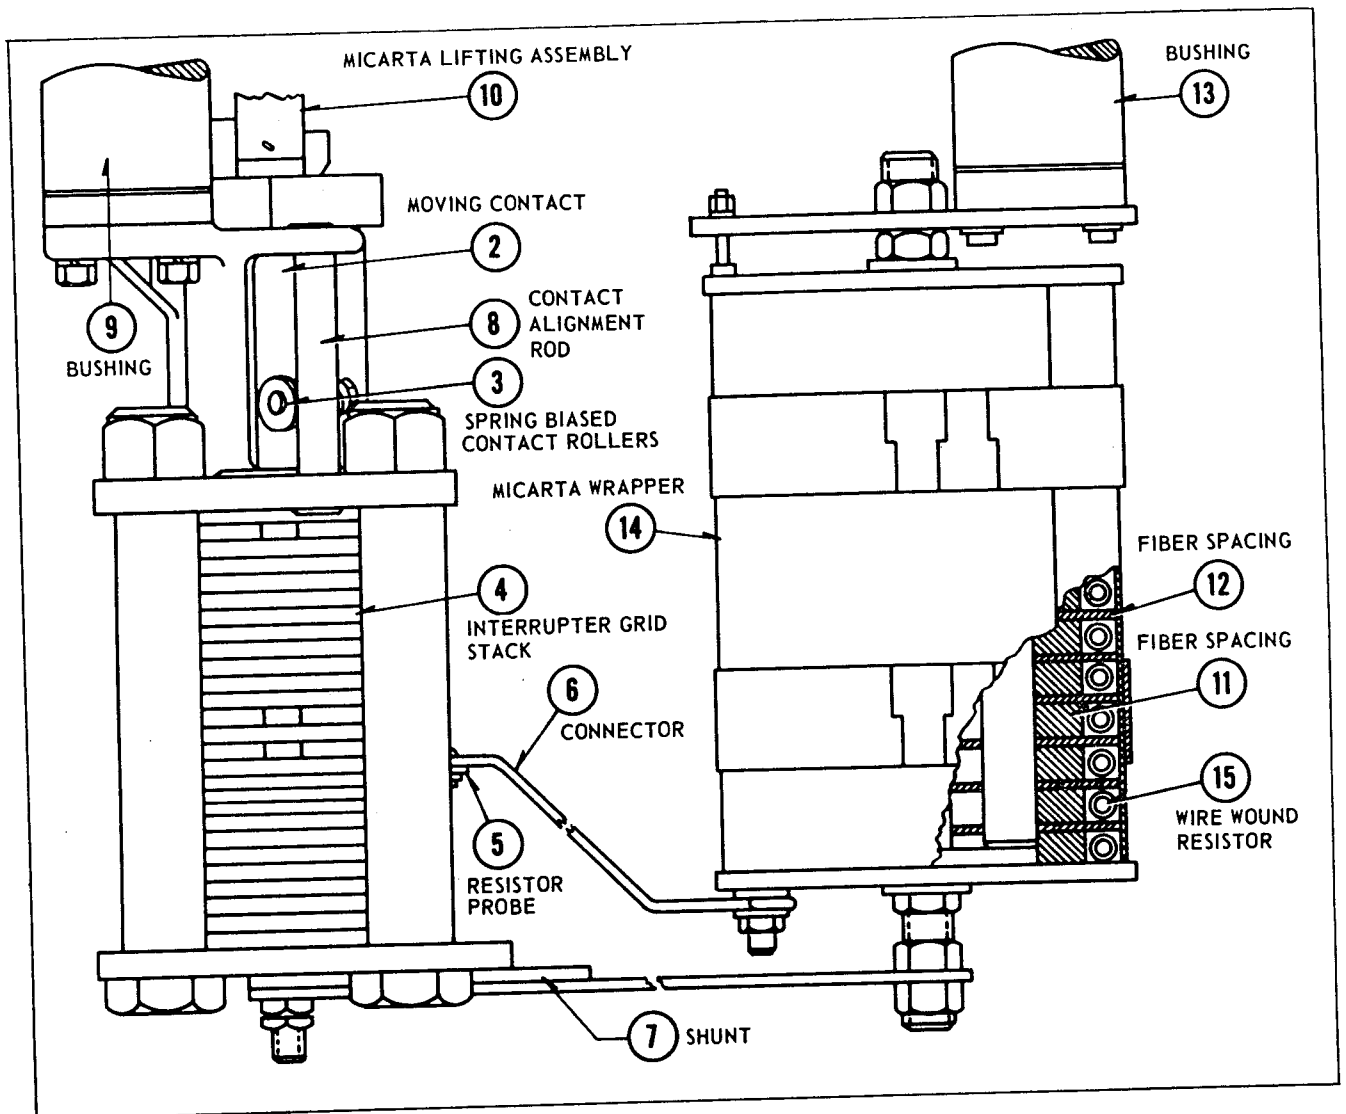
PRC and PRCB Interrupter and Resistor Assembly
